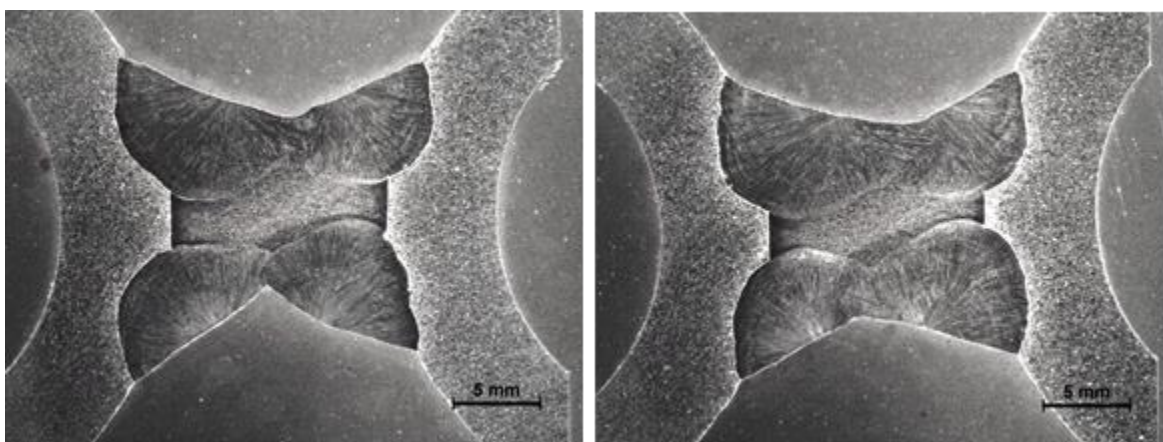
u Macrographs from a HR6W panel at T4-T5 weld (left) and T6-T7 (right)
